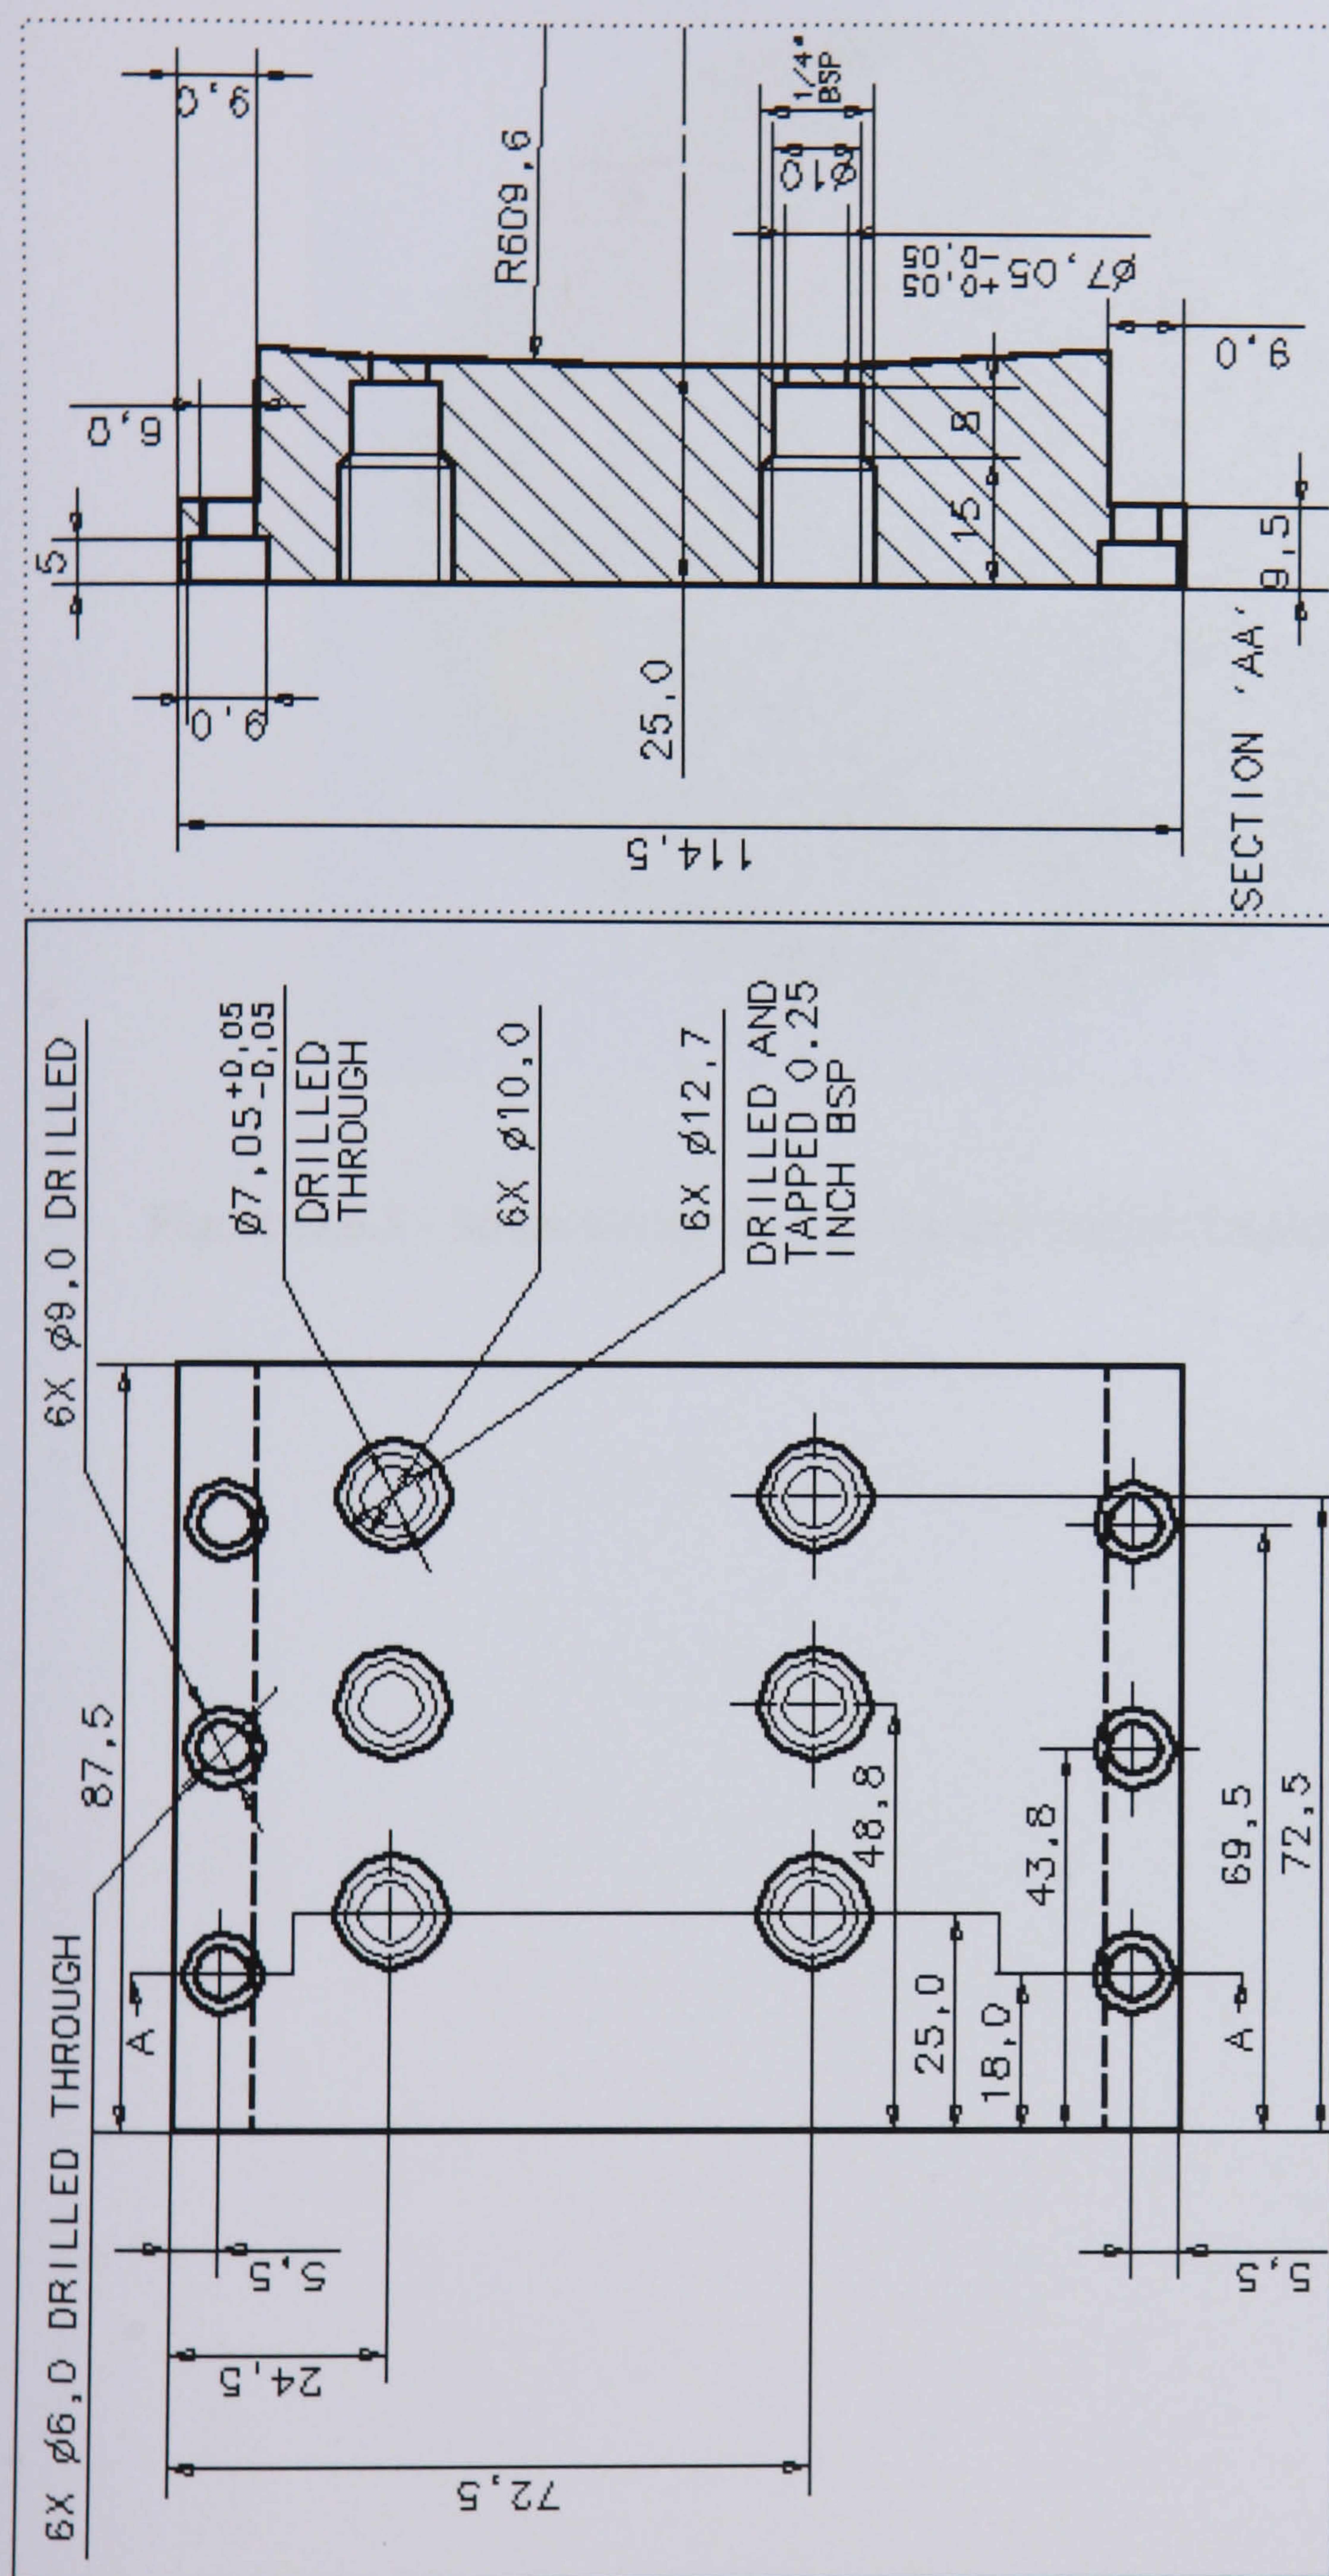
Capacitance Probe Securing Bolt Engineering Drawing
